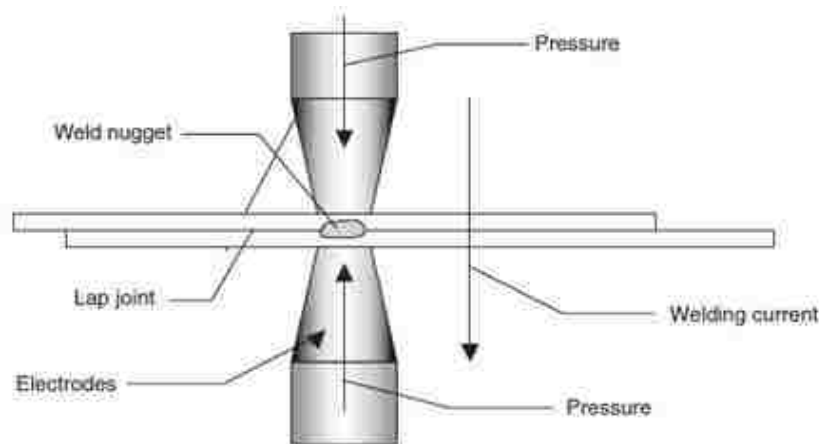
Basic scheme of spot welding process [4]
